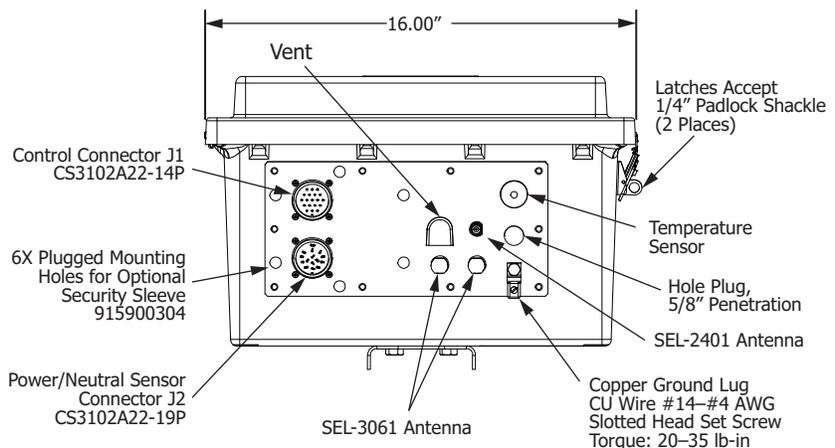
Bottom View of Enclosure With Combined Sensor Connector
